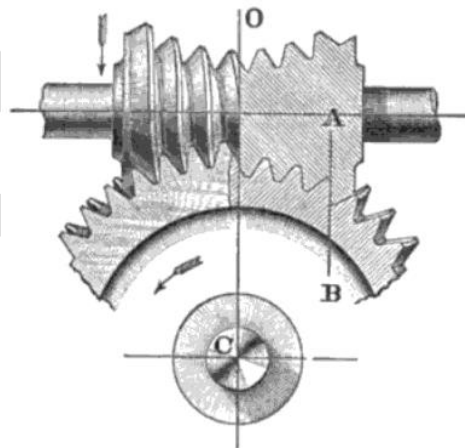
(right): Illustration of the Hindley Screw, which Morse, Williams & Company were the first to implement in elevator machinery. The company held the exclusive right to this innovative type of gearing for many years, making their elevators some of the most efficient on the market.
